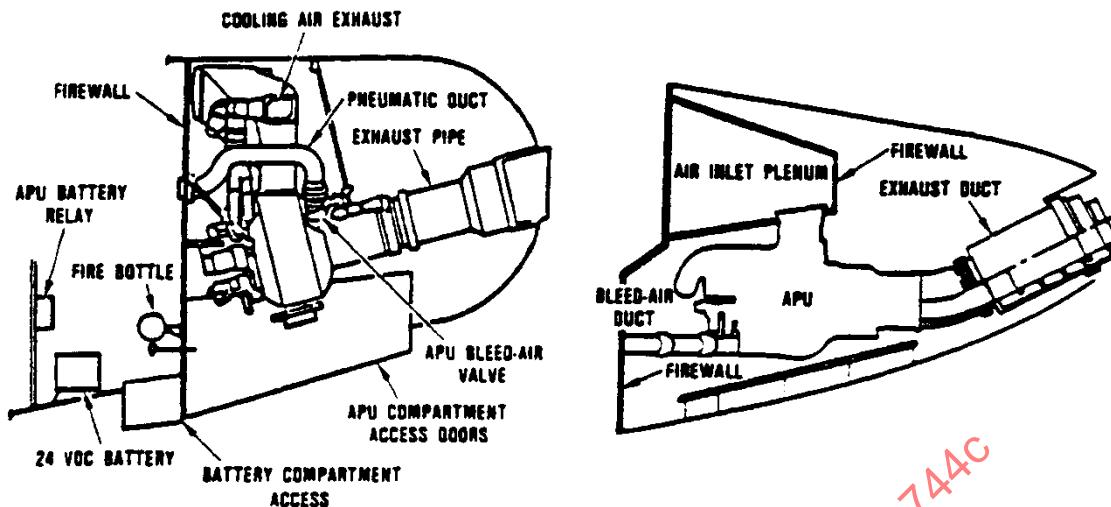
TYPICAL APU TAILCONE INSTALLATIONS
